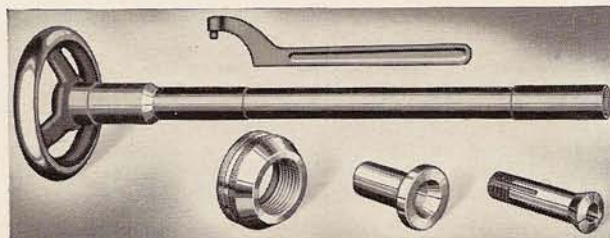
Hand Wheel Draw-in Collet Chuck Attachment.
